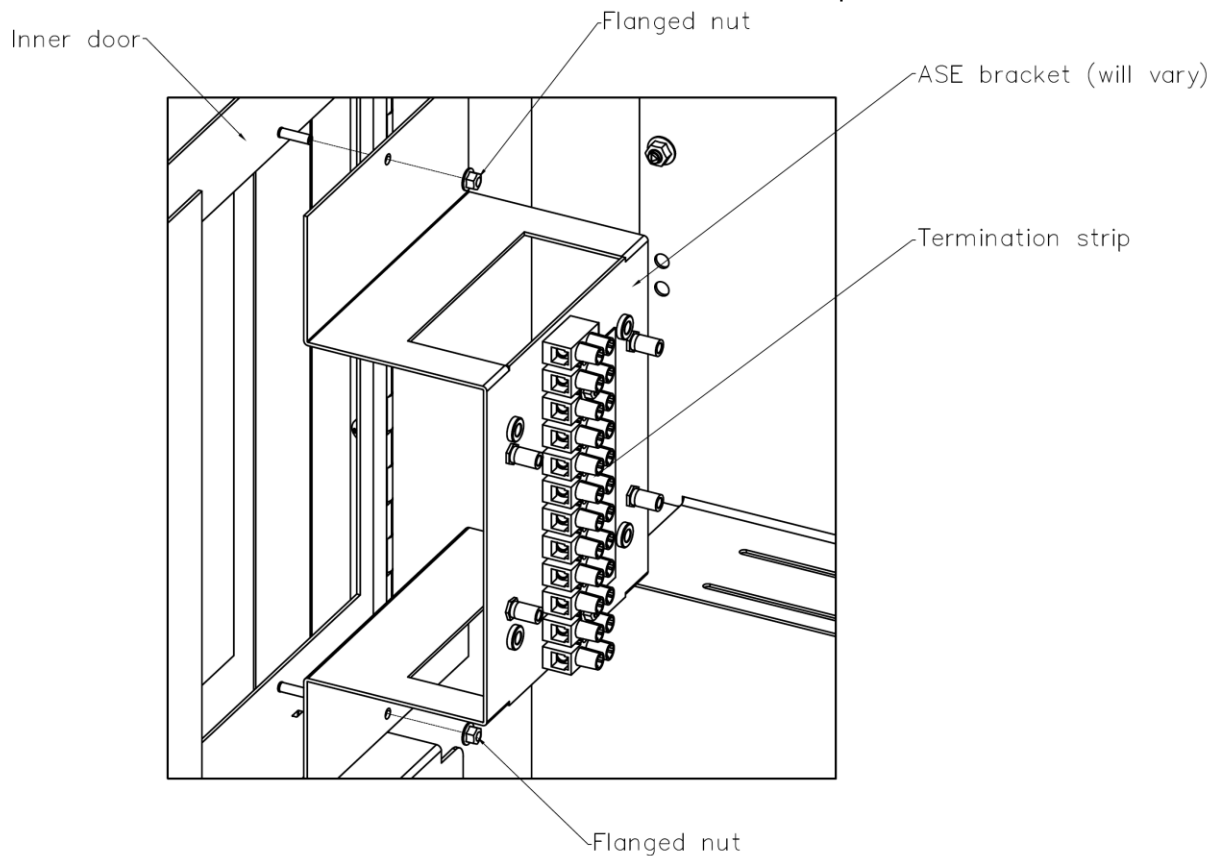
Mounting ASE Bracket Assembly to the Inner Door
